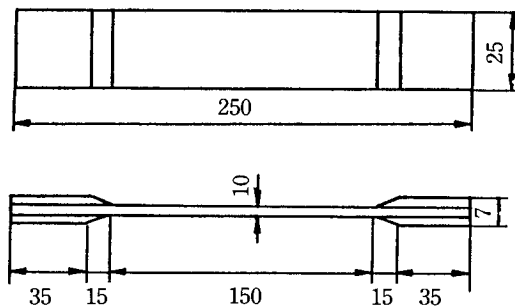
Dimension of Carbon/BMI Tensile Specimen $(\pm 45^\circ)_{2s}$ in mm.
